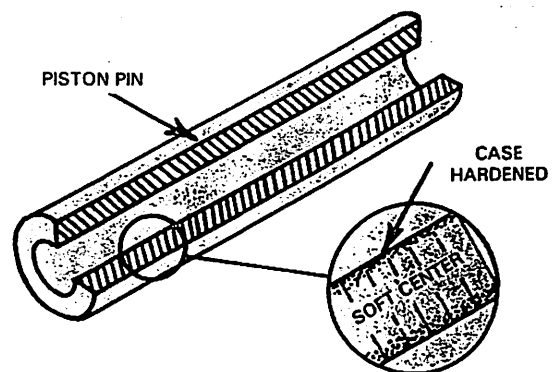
Sectioned piston pin shows thin skin of casehardening.
